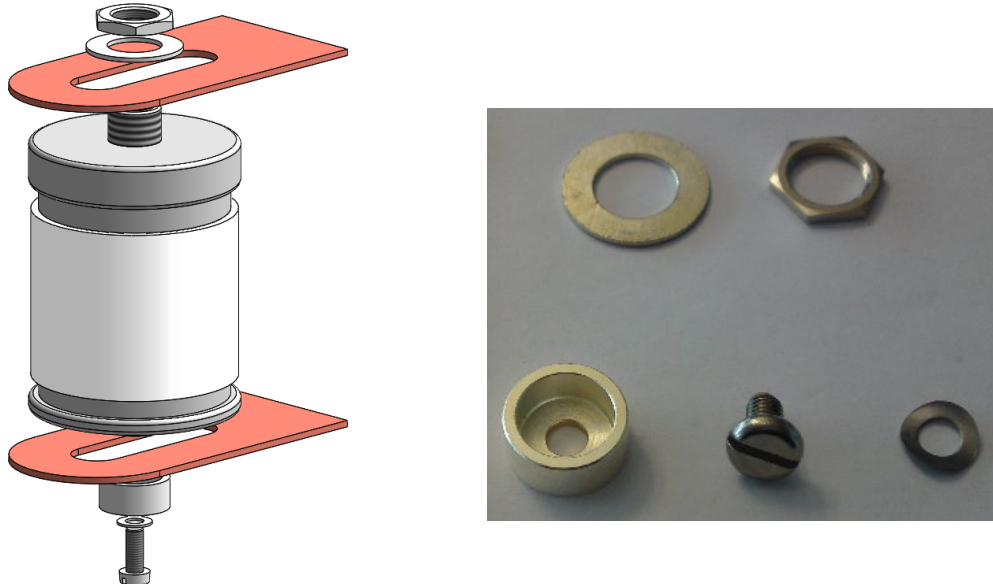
Schematic view of mounting of CTMN D geometry with mounting kit 20055475
